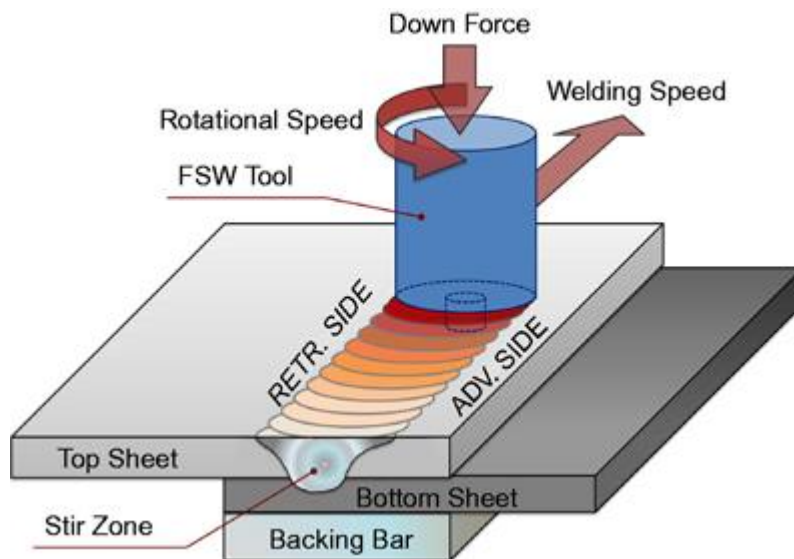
Schematic picture of lap joint in Friction Stir Welding [12]
